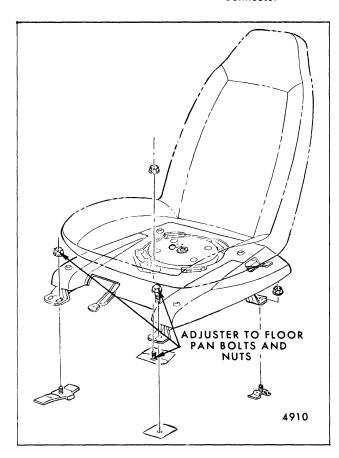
Front Seat - Swivel Bucket Seat (Drivers Side Shown - Passenger Side Typical)
